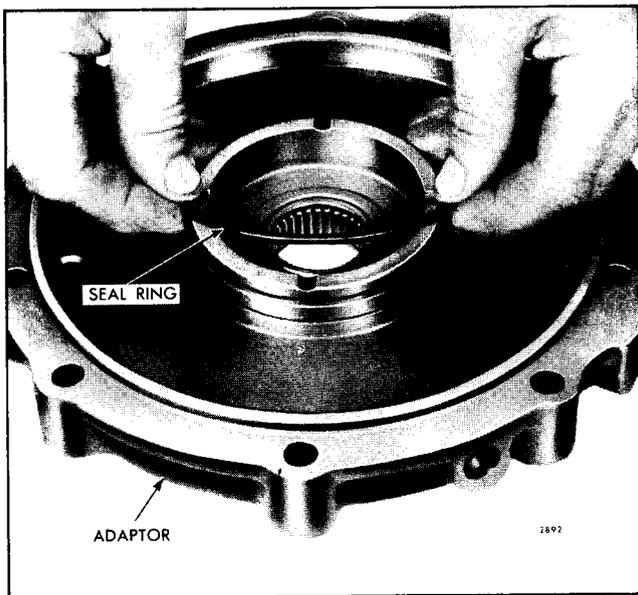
Installing Reverse Clutch Piston Seal Ring in Adaptor
